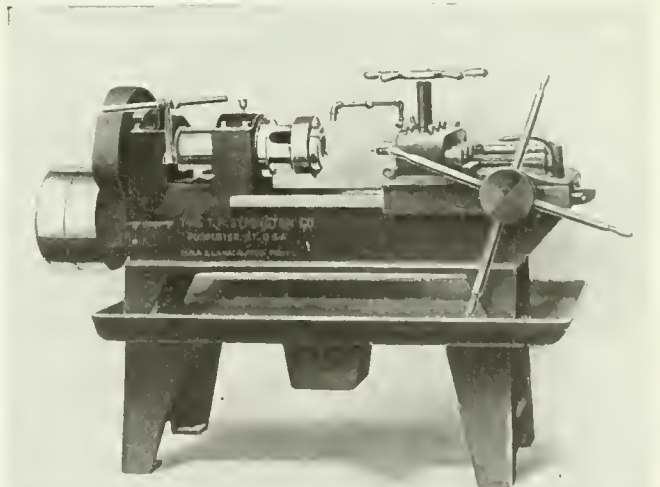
FOUR-TOOL MACHINE FOR MACHINING AND FINISHING THE INTERIOR.
